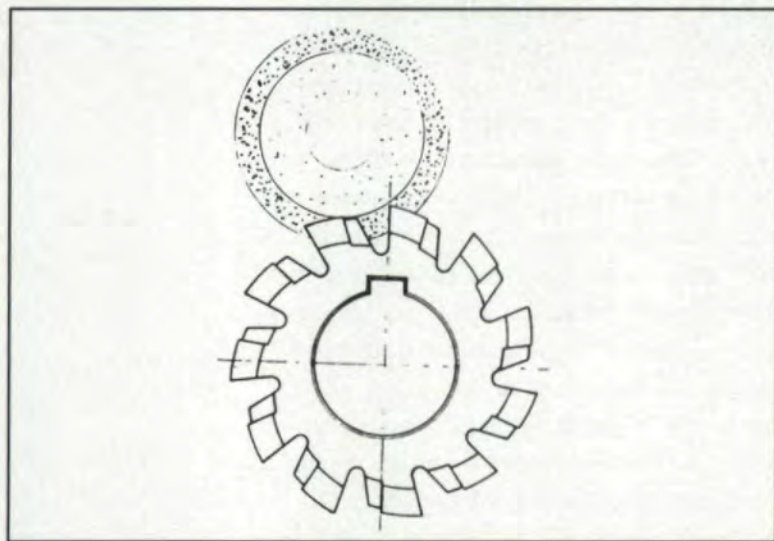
Conventional hob form grinding. (Courtesy FHUSA-Fabricacion de Herramientas y Utensilios.)
